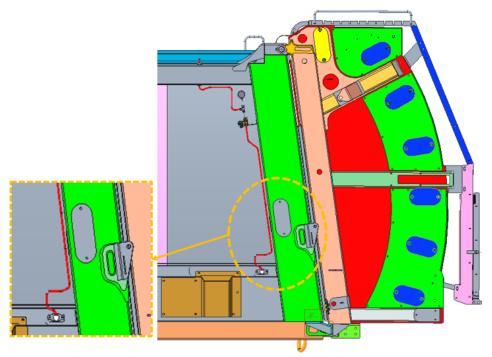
Street Side Body Tube Assembly for New Heil System - Launched in April 2024
